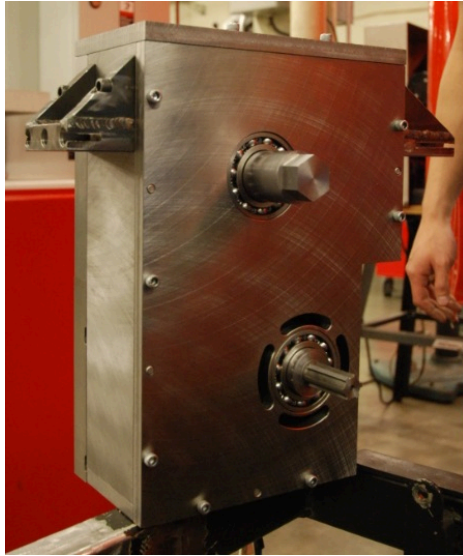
Complete Final Assembly of Gear Reduction Case
